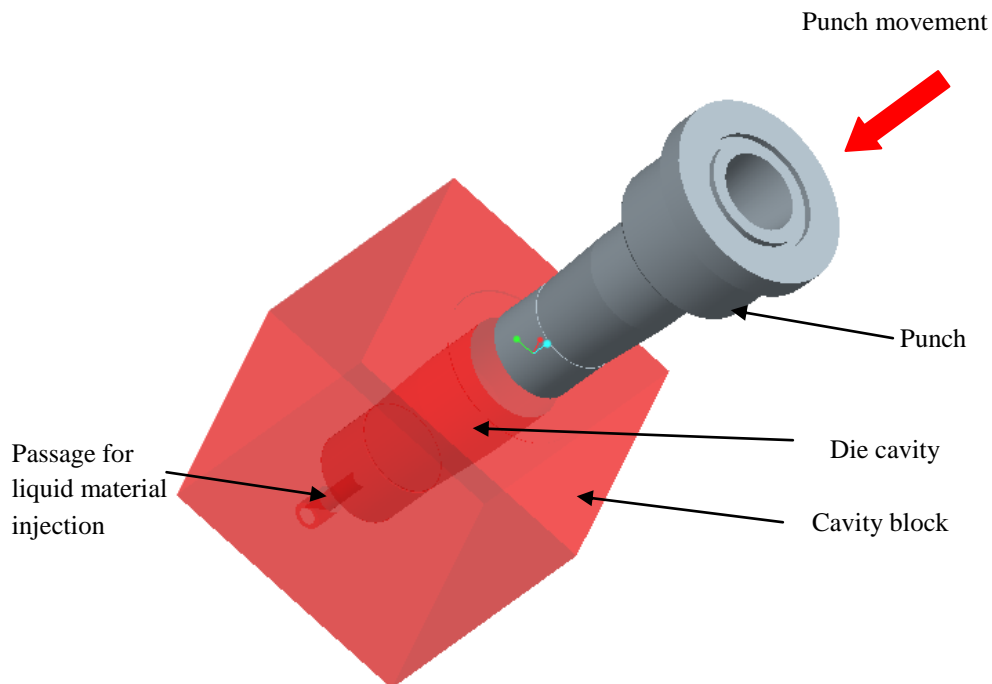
A 3D arrangement of permanent mould punch with die cavity
